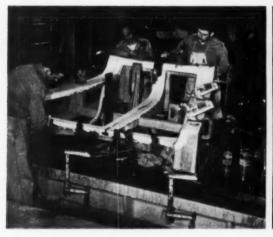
Clamps and air valves are mounted on welding fixture
